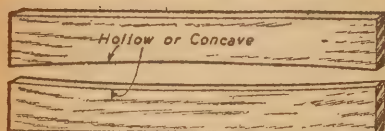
Best edge for joining up to make wide boards (exaggerated).
